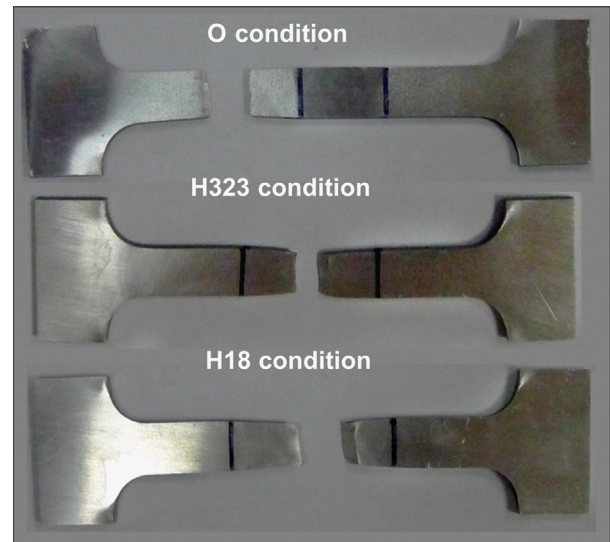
Appearance of friction-stir welded transverse specimens tensioned to failure. The black lines indicate the weld borderlines.
